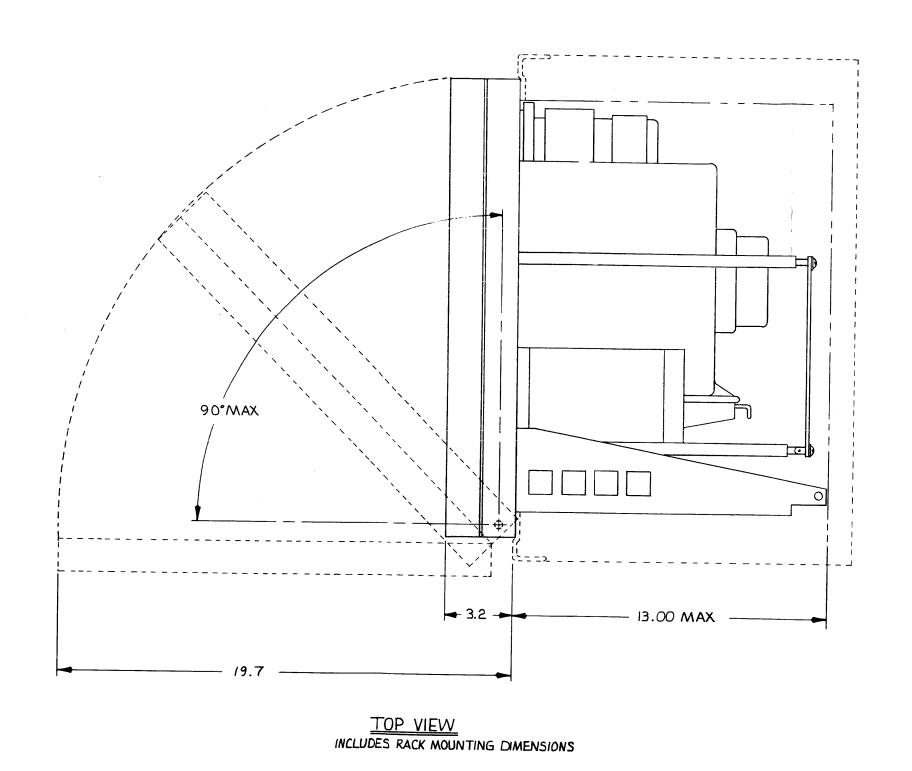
Model 900X Outline Dimensions (Sheet 2)
